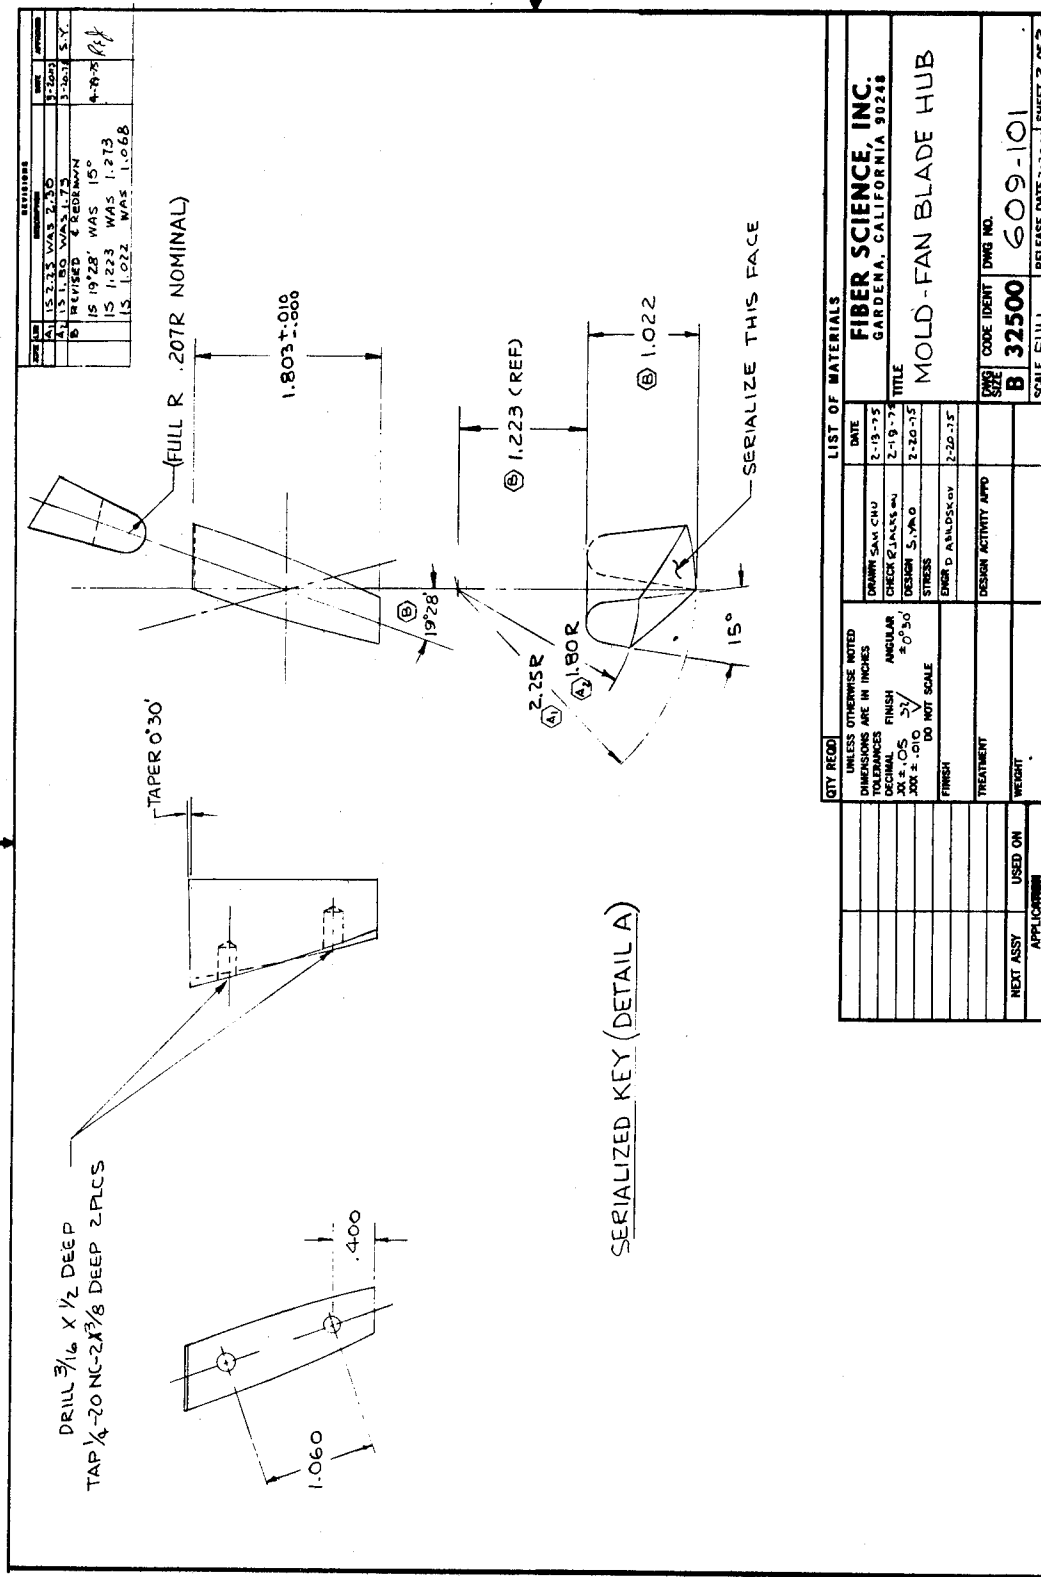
Mold-Fan Blade Hub, Drawing No. 609-101
